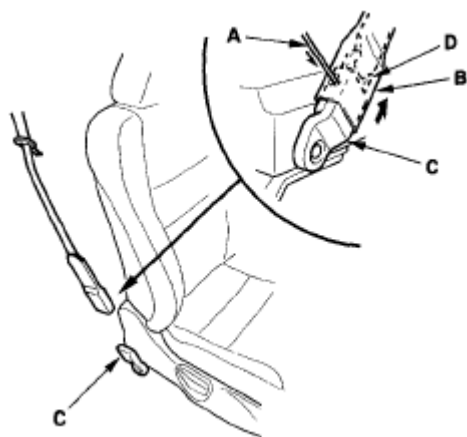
Detaching Front Seat Anchor Plate And Anchor Cover From Lower Anchor
